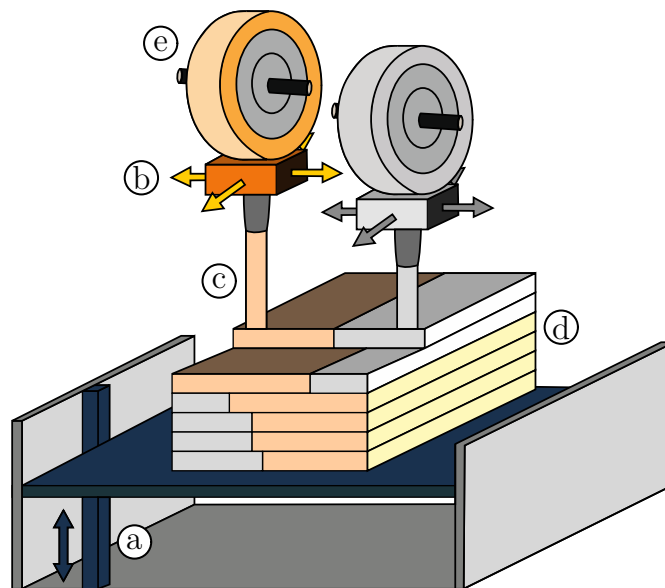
Fused deposition modelling machine consisting of (a) vertically movable base platform, (b) tempered extrusion printing head for deposition of (c) model and (d) support material stored in (e) feedstocks containing filaments or pellets of thermoplastic materials [22].
